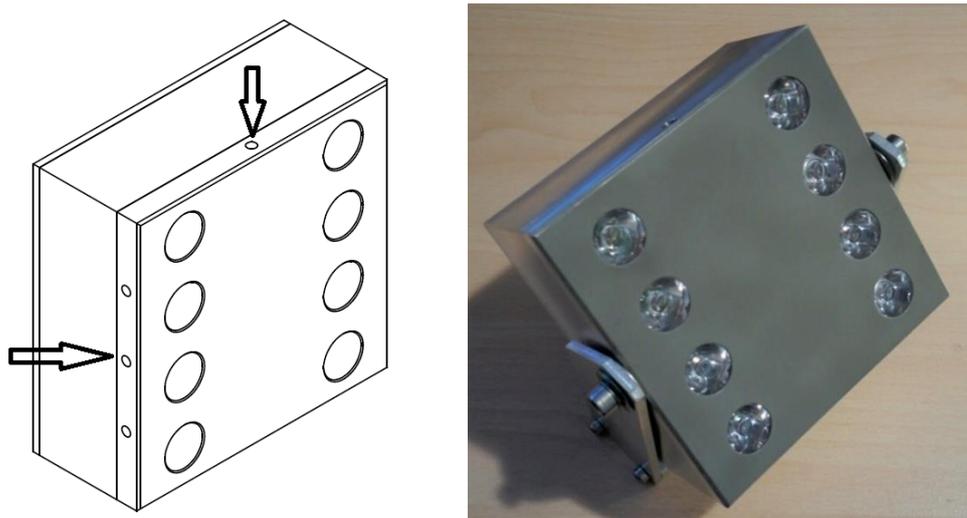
Position of mounting holes. On the right a photo of the unit placed in a mounting bracket.
